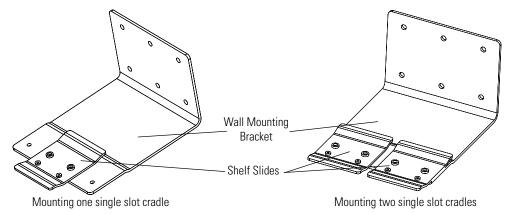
Wall Mounting Bracket with Shelf Slide
